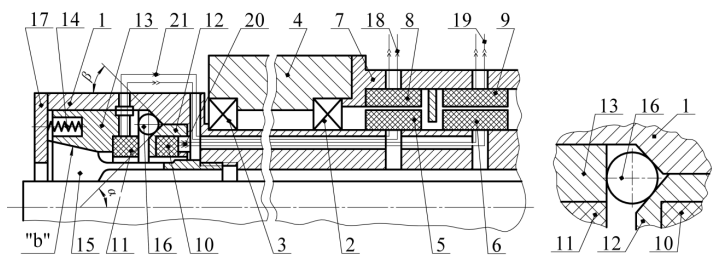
Automatic clamping mechanisms as a part of the spindle assembly of the machine according to the structure (2)
